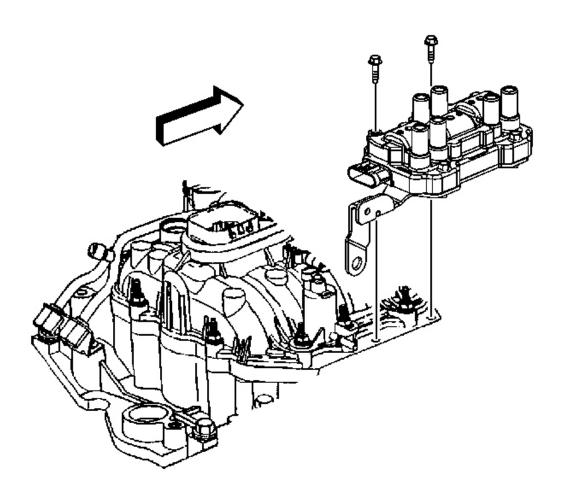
View Of Studs And Ignition Coil Courtesy of GENERAL MOTORS CORP.
